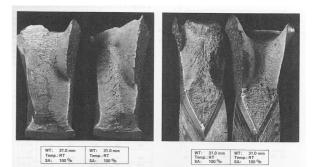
Appearance of fracture surfaces [API notch (a), Chevron notch (b)]
